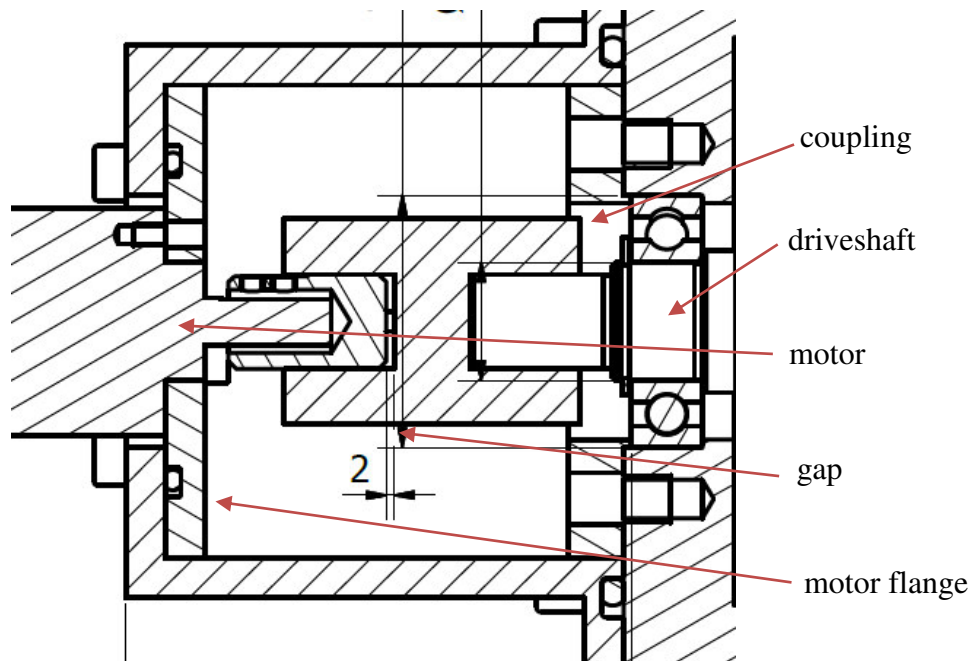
Connection of motor to housing using a bell-shaped housing.
